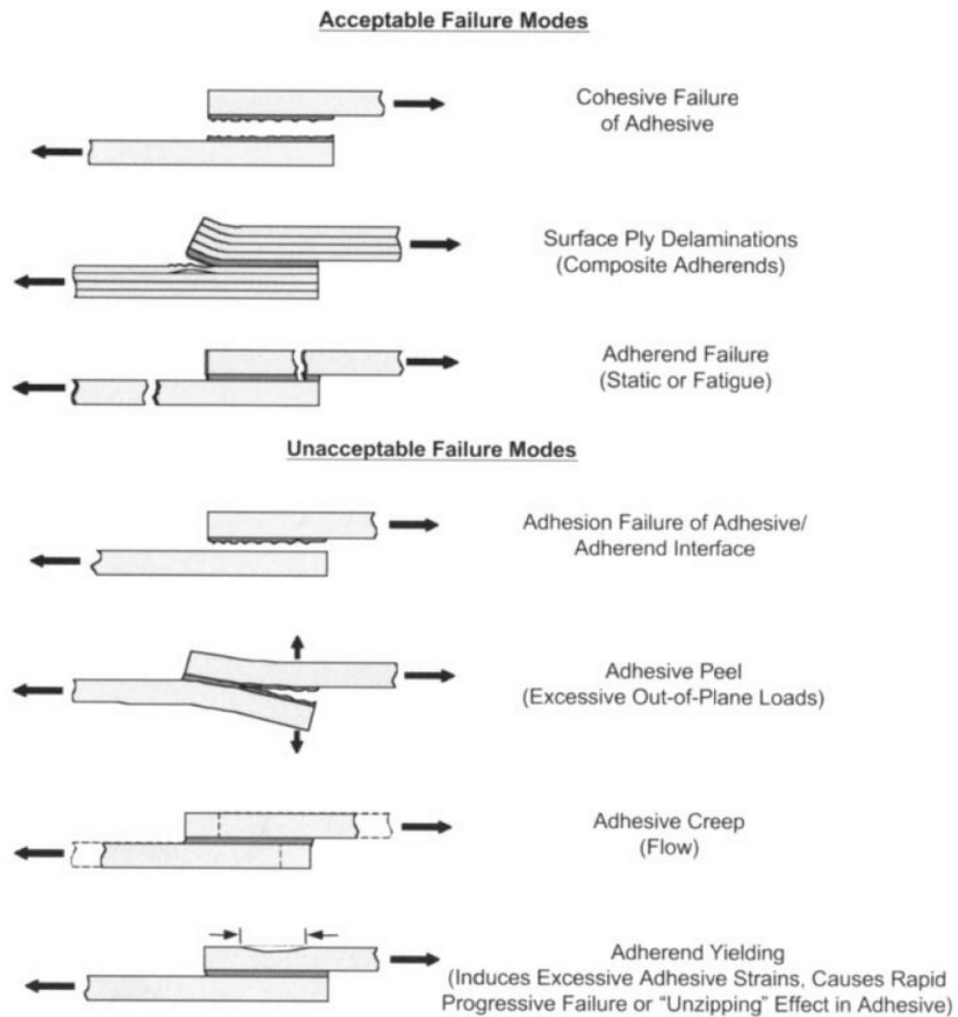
Typical failure modes of bonded joints (Campbell, 2011)
